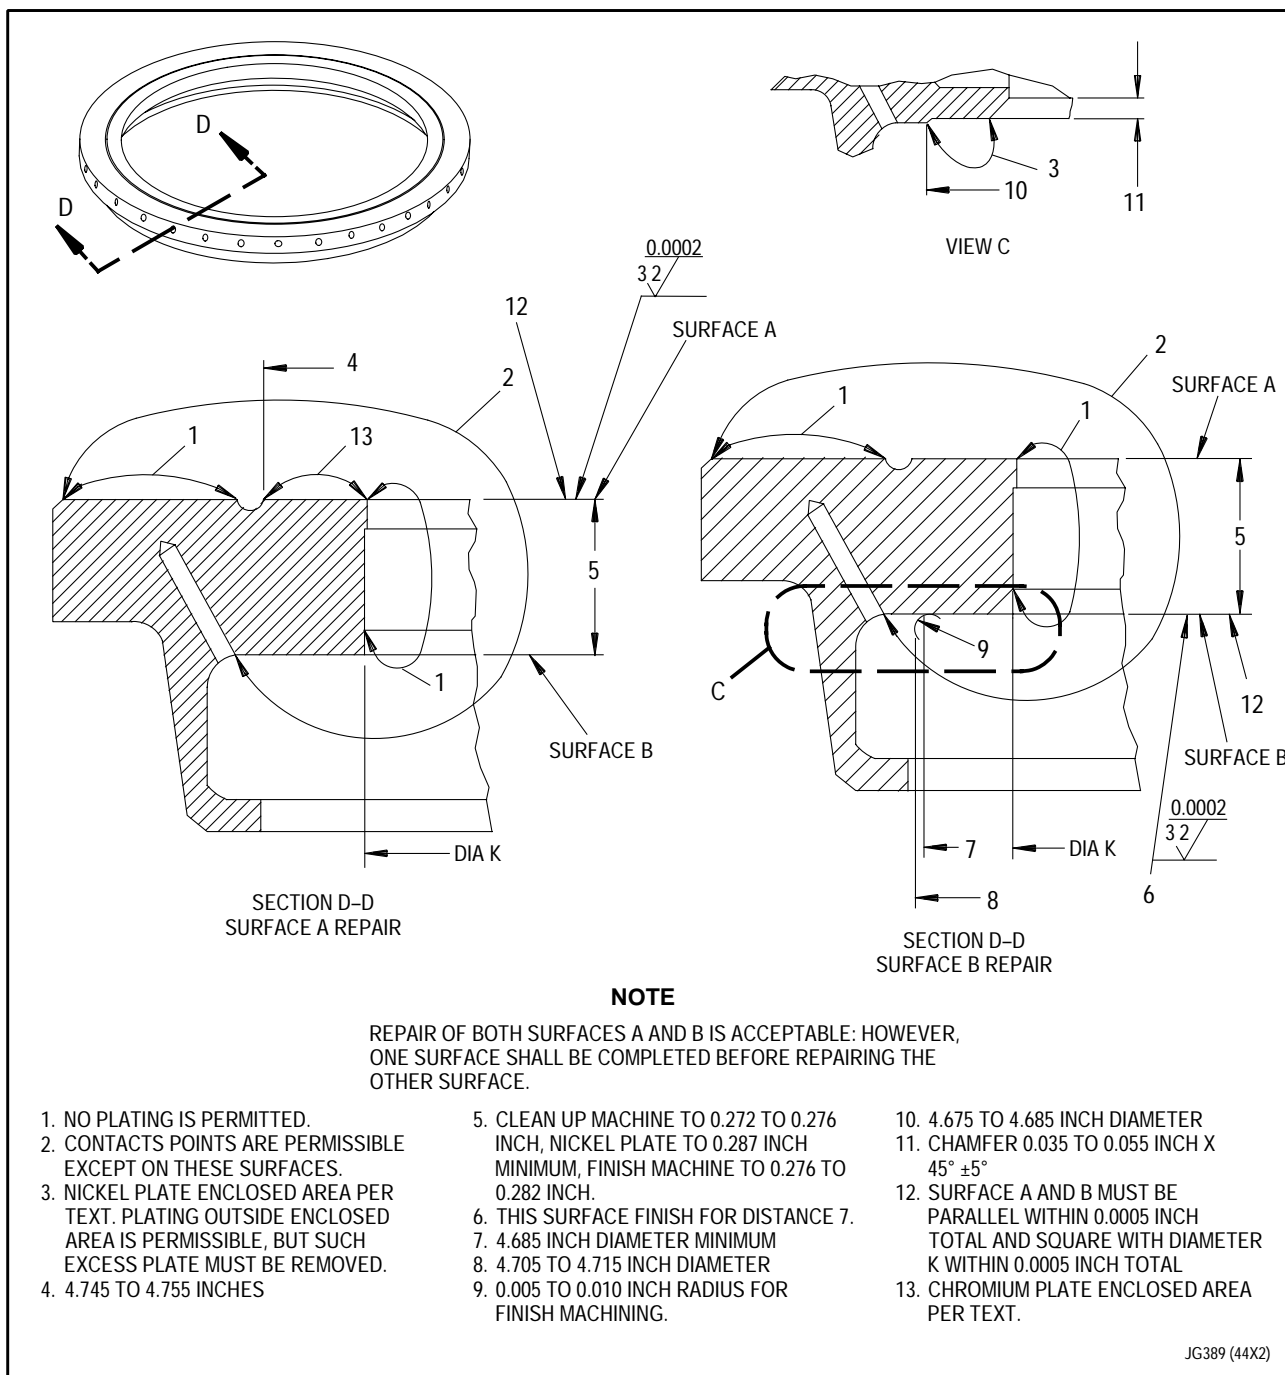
No. 3 Bearing Front Seal Seat Assembly - Plating Repair (PN 4022669)
